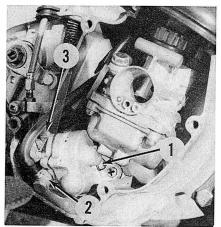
View of oil injection pump installed. Pump drive gears are lubricated by oil at screw (1). The oil inlet line runs from the tank to inlet union (2). Outlet union is shown at (3).
